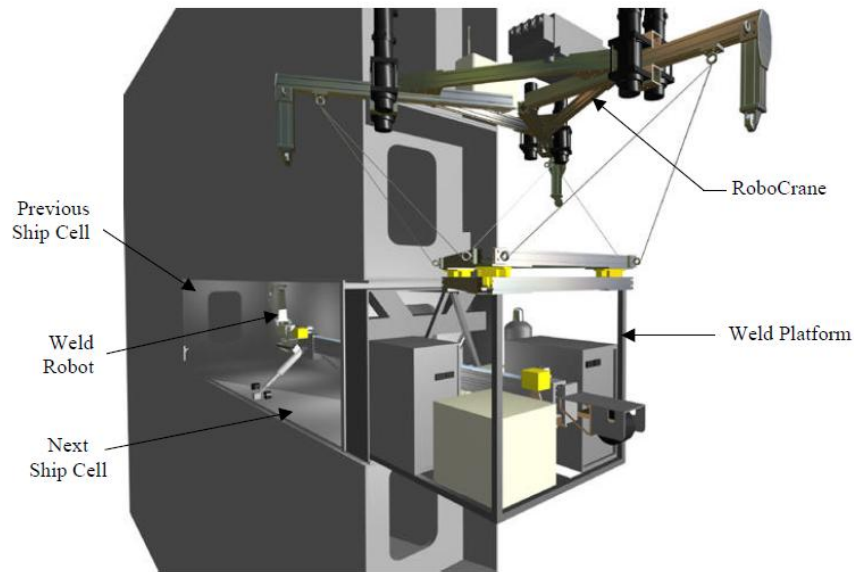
The NIST RoboCrane used in Ship Welding Application [11]
